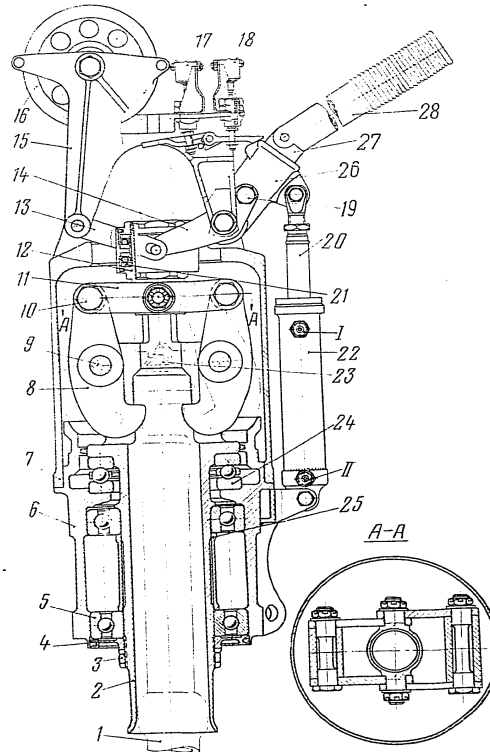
LOCK WITH HYDRAULIC CYLINDER
